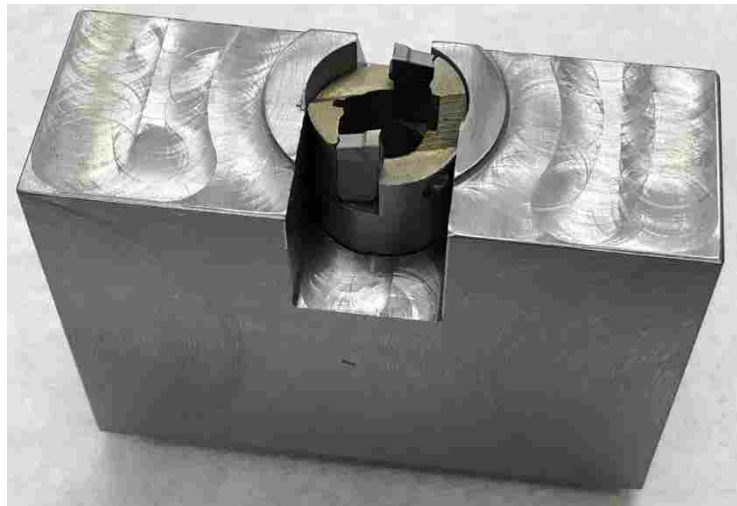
Underside View of Cutter Assembly Mounted in Clamp Block
